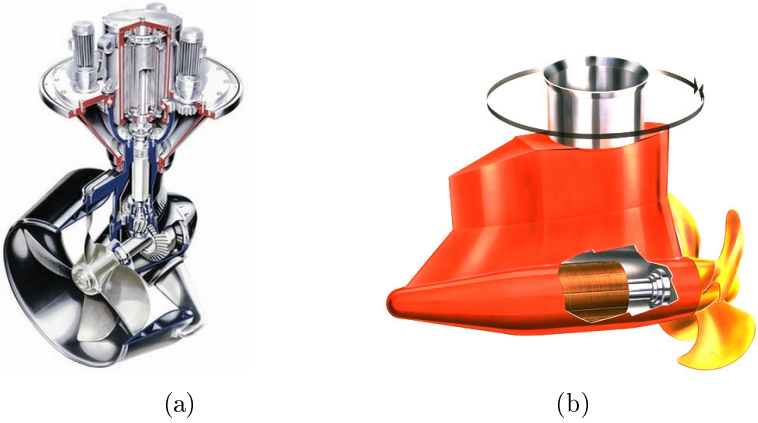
Examples of marine propulsion units: a) L-type azimuth thruster [22] b) Pod equipped with electrical motor [23].
